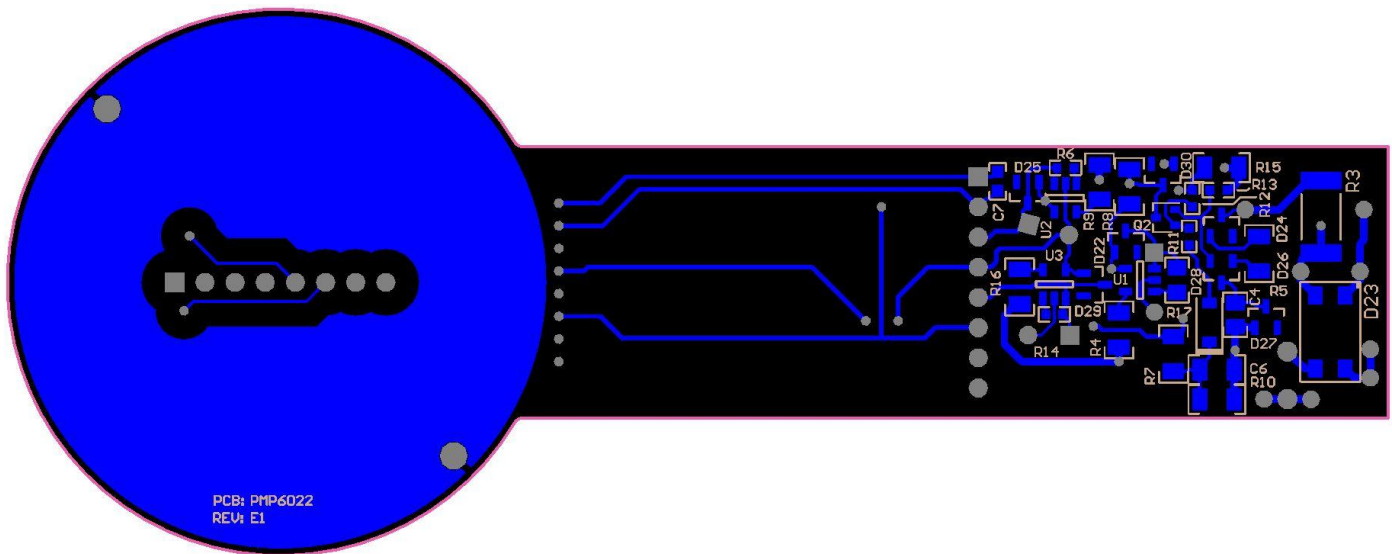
Bottom Layer and Bottom Overlay (Bottom view)
